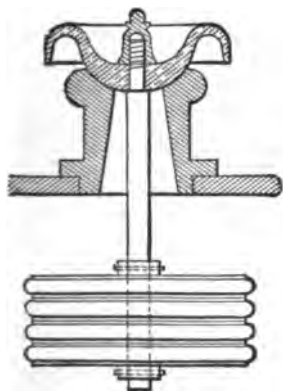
Dead-weight Safety-valve. Weight inside of boiler.
